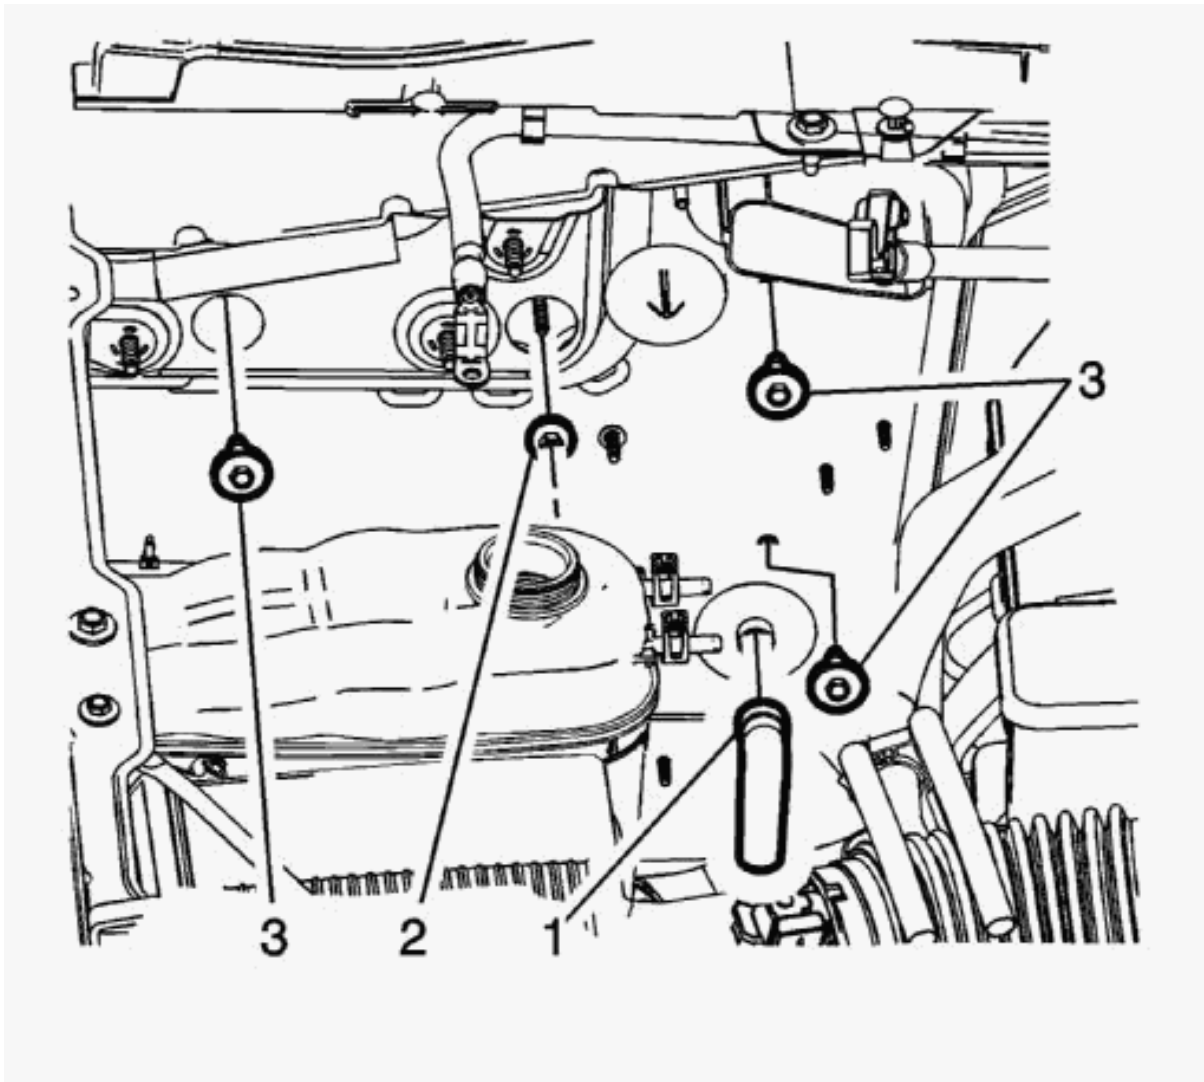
Air Conditioning Evaporator Case Drain Tube
